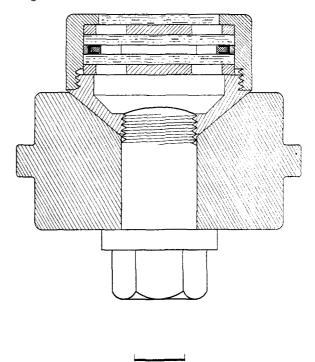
The first type of rotor described in the text (shown with the jig which is used to hold the cone of the rotor while the rotor is being assembled—a plumber's strap-wrench is used on the upper part).
